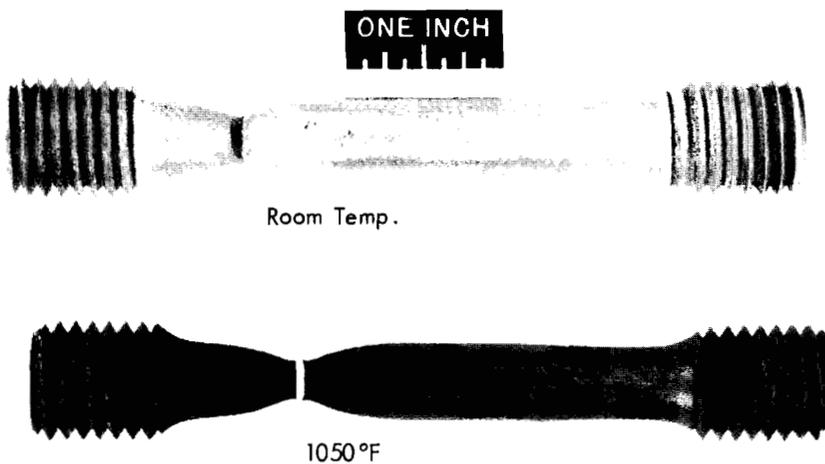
ASTM A-387 D-to-Type 304 Stainless Steel Transverse Tensile Specimens Welded with Inconel-182 Electrode.
